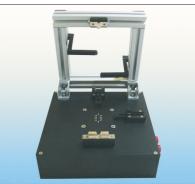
SIDE VIEW OF THE FIXTURE WITH CELL CLAMPS RAISED
